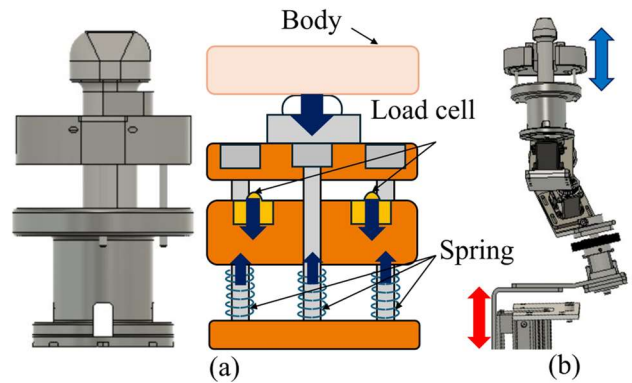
Probe force adjustment mechanism (a) Measuring section (b) Pressurizing and depressurizing section
